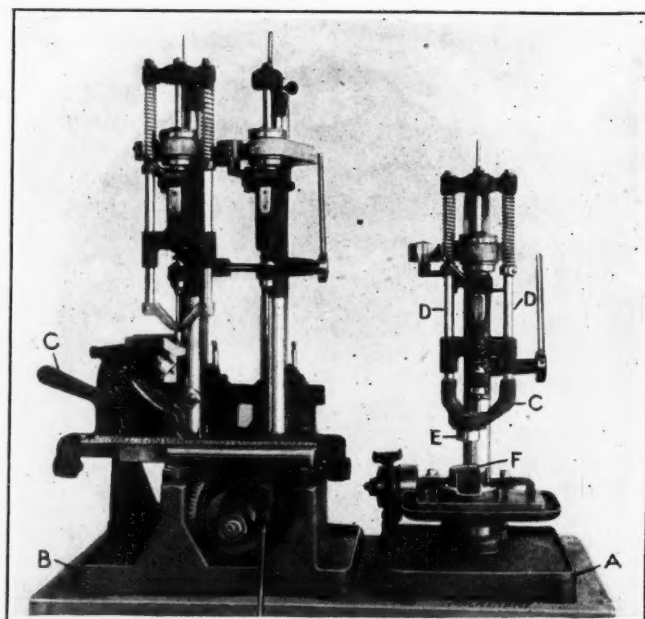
Single-spindle and Gang Drills used for Straight and Angular Work on Fuse Body (Work removed)
